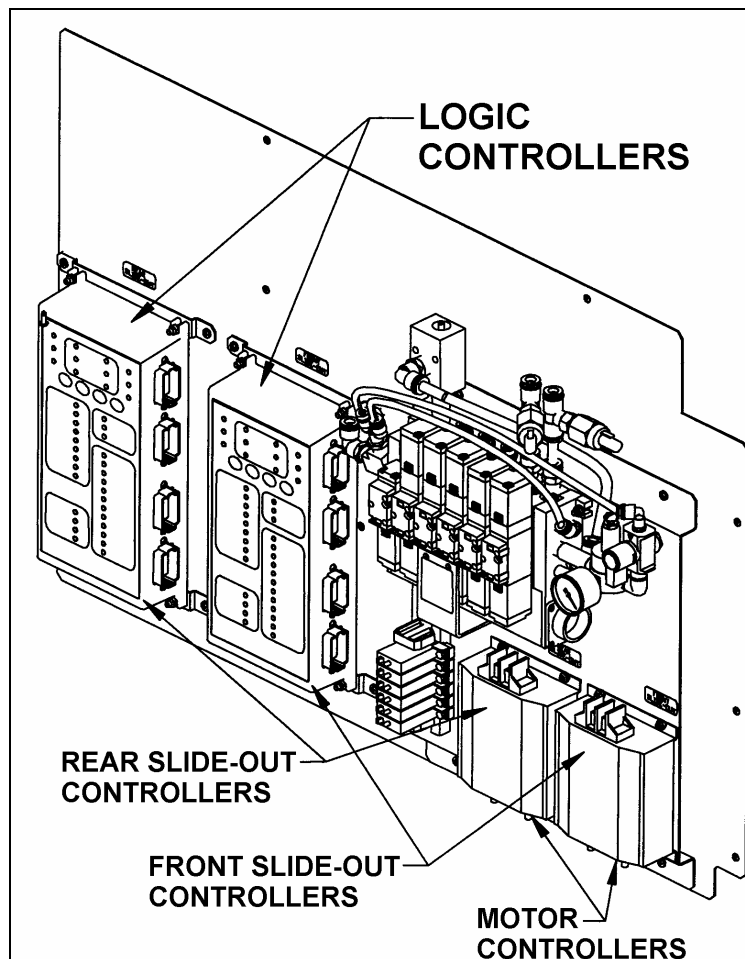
SLIDE-OUT ELECTRICAL & PNEUMATIC PANELS
